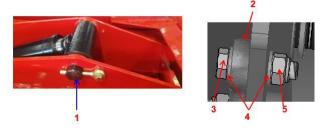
Installation of third layer lower cylinder (upper end)
